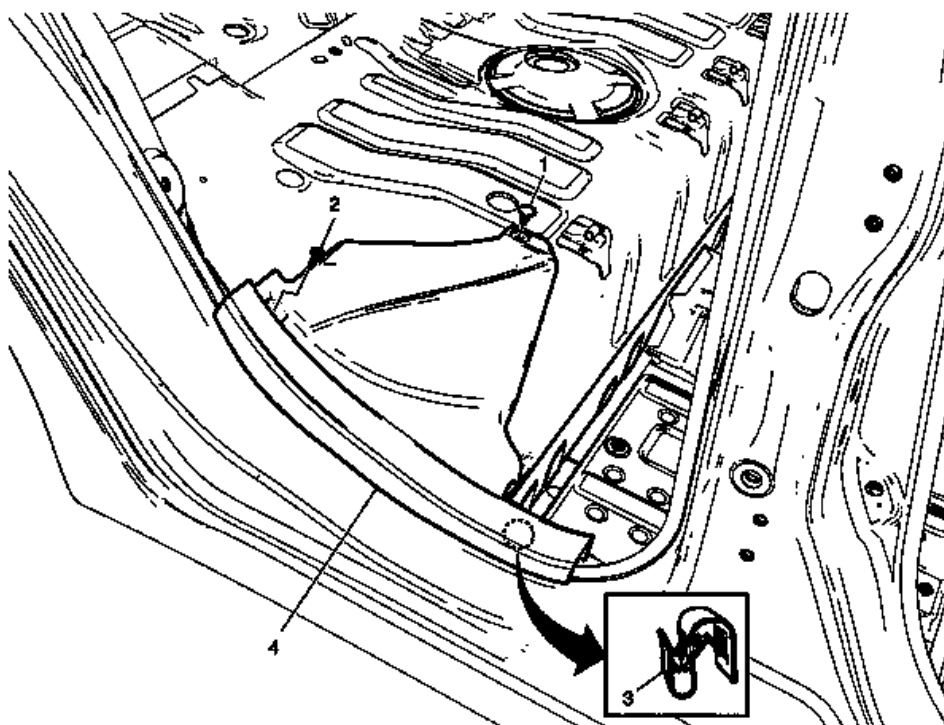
Rear Side Door Sill Trim Plate Assembly
